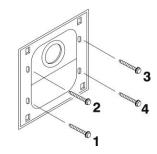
Screw the self-tapping screws through holes in rear panel of SP2500LP speaker box
